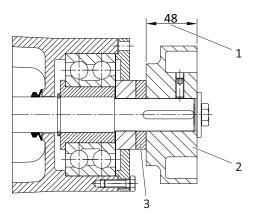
Example for assembly of the coupling hub with spacer washer
